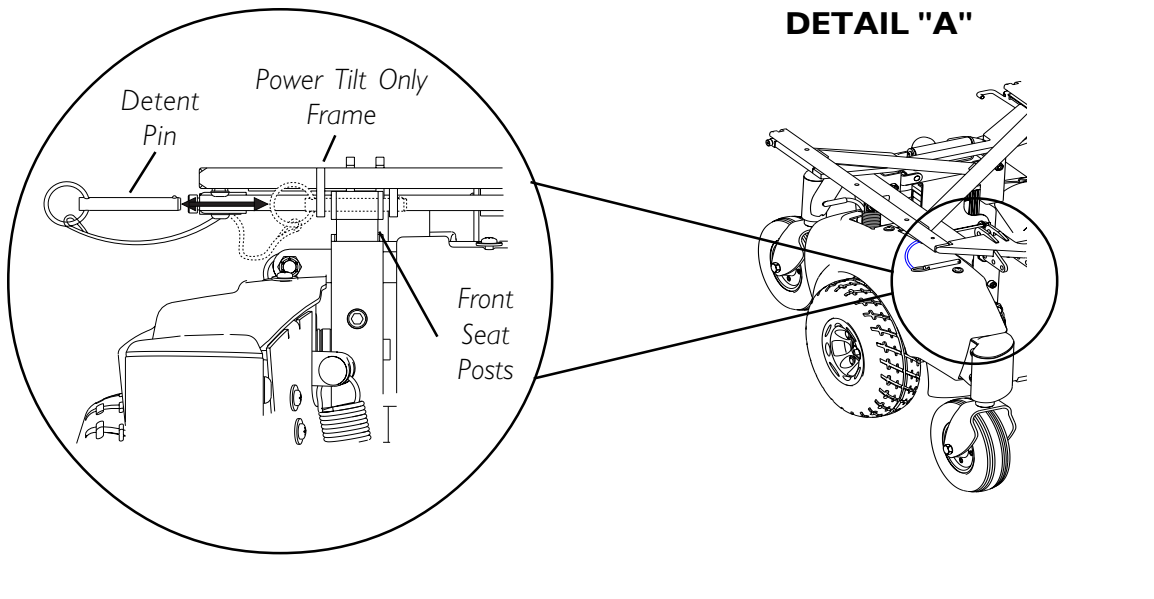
TILTING THE SEAT ASSEMBLY
